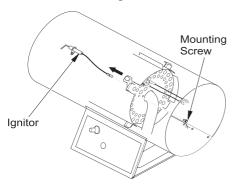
Removing Ignitor Mounting Screw and Ignitor
